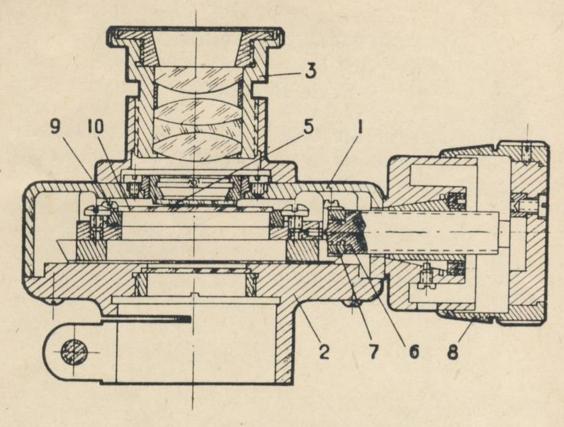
Sectional View of the Eyepiece Screw Micrometer:
